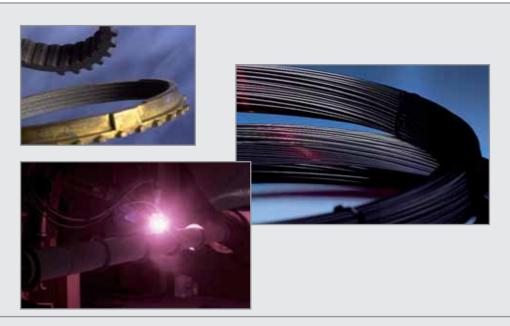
Traditional molybdenum coating applications. Clockwise from lower left: coating a shaft for wear resistance, molybdenum-coated synchronizer rings, molybdenum wire for flame spray coating.
